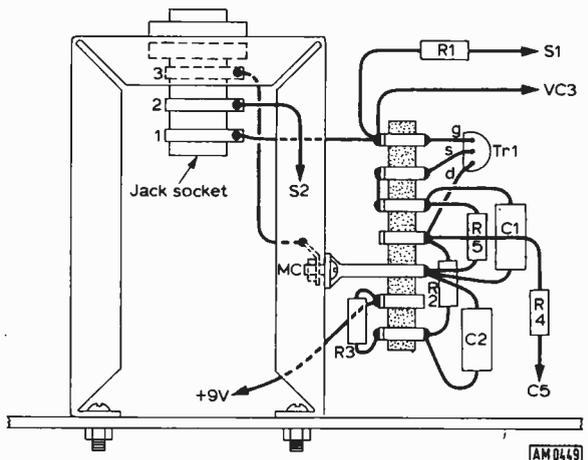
The mounting for the rotating aerial, and the lag strip that holds the RF stage, is constructed from a Universal chassis flanged runner and bent to fit.
